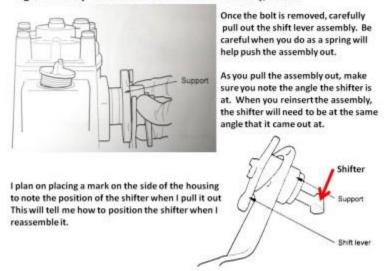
Step 2 Remove Shift Lever Assembly, Con't.
